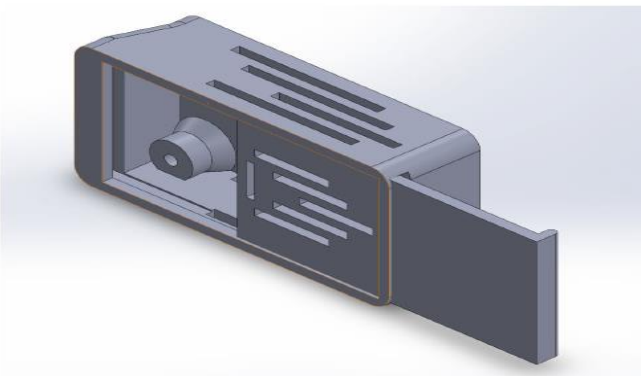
Front (isometric) view of 3-D printable container with sliding door open
